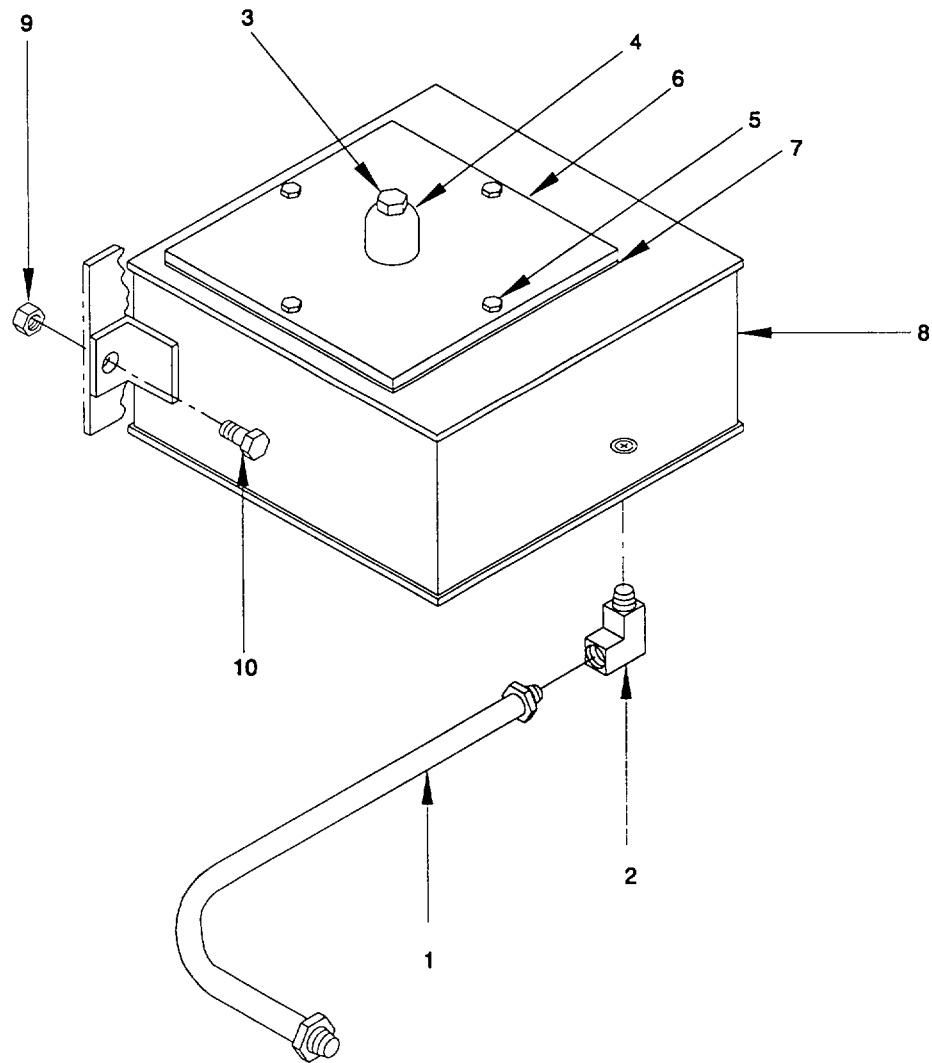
Pump-Jet Expansion Tank Remove/install.
